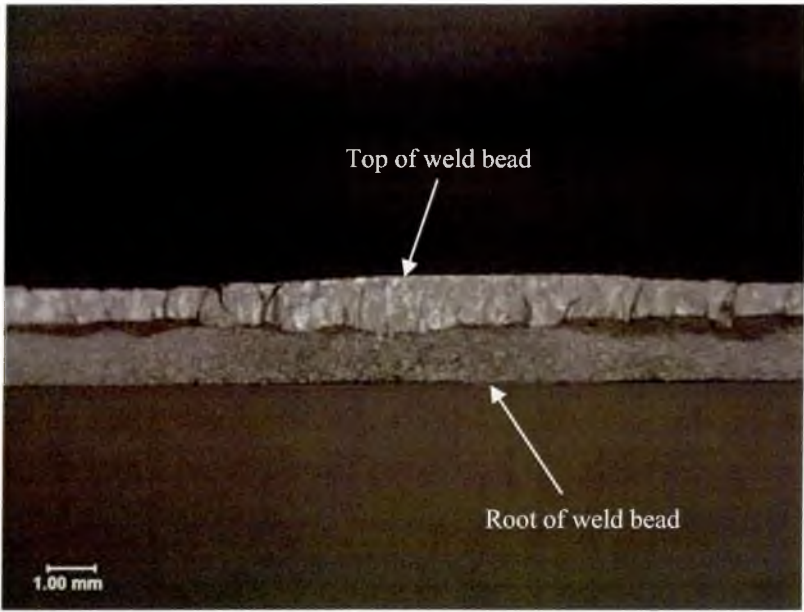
Typical fracture surface of CMT similar thickness fatigue specimen.
